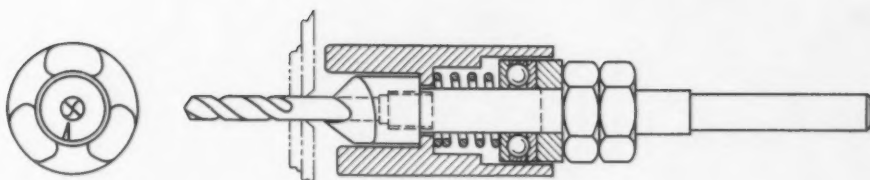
Combination drill and countersinking tool used in preparing holes for flush riveting of airplane skin structure. The spring-loaded collar helps in holding the sheets together during this operation.
